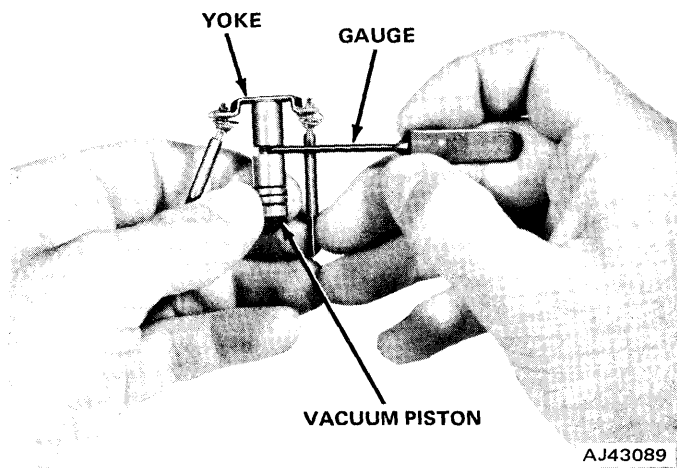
Metering Rod Vacuum Piston Adjustment
